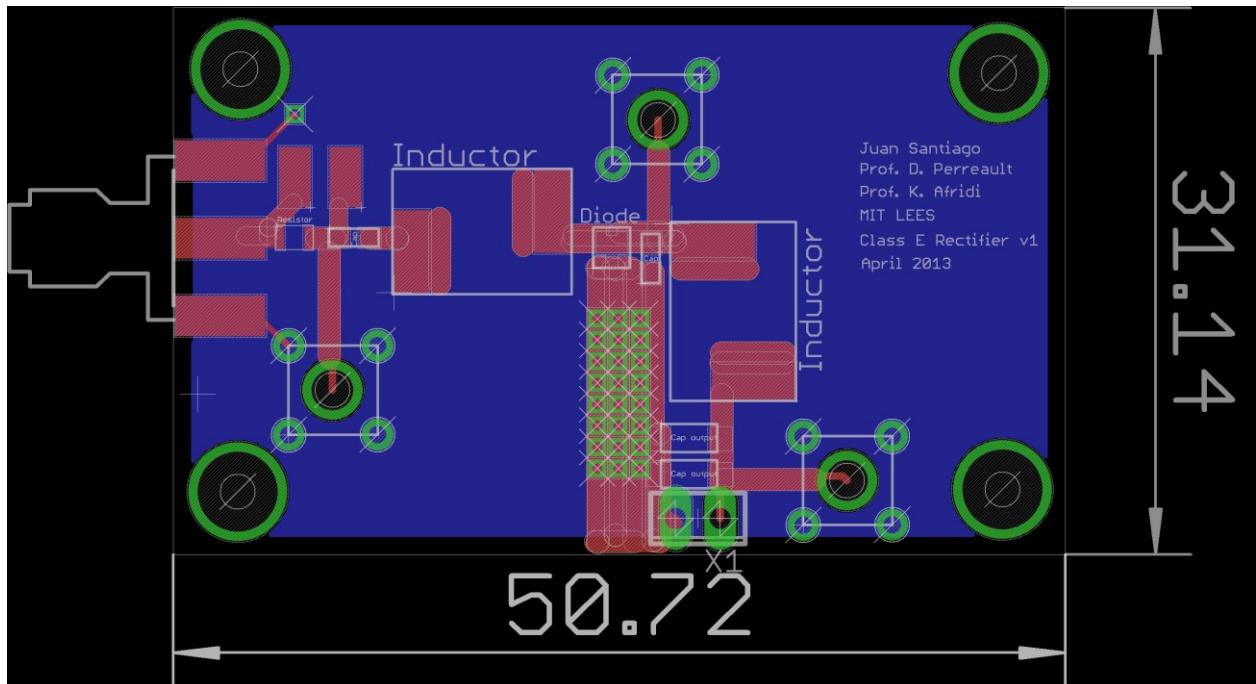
Layout of class E rectifier circuit board. The dimensions are in mm.
